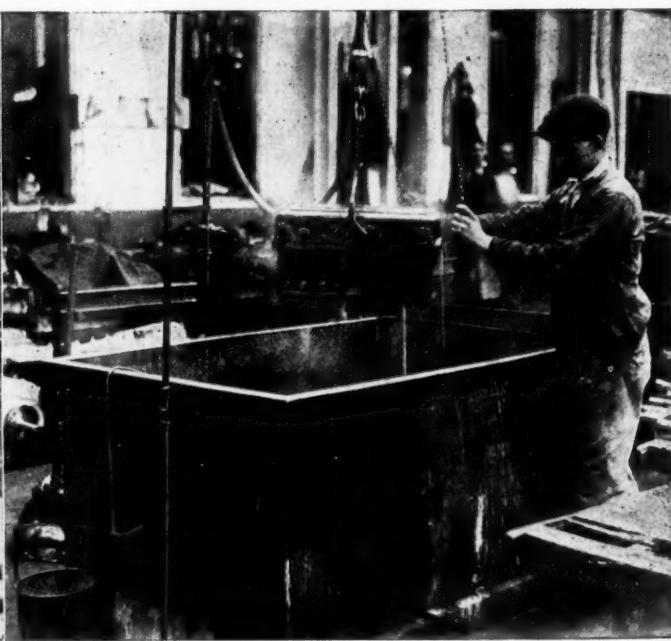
Cleaning gray iron cylinder blocks for motor assembly track
